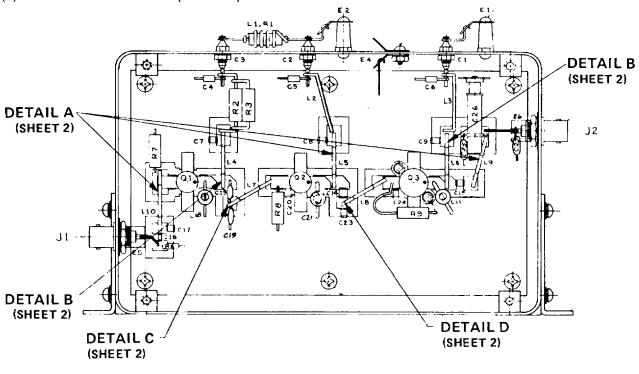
Modulator Circuit Card Assembly, 1A4A4A1 Parts Location Diagram
